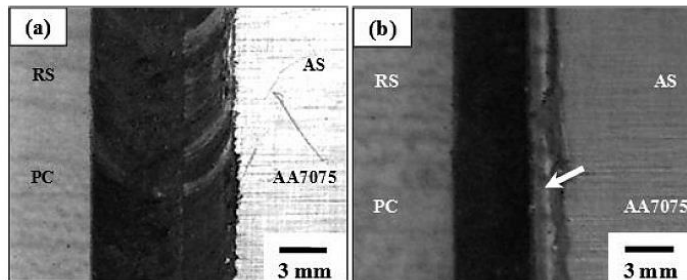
Surface appearances of the welded joint at 3500 rpm and 50 mm min⁻¹ (a) front side (b) rear side.
